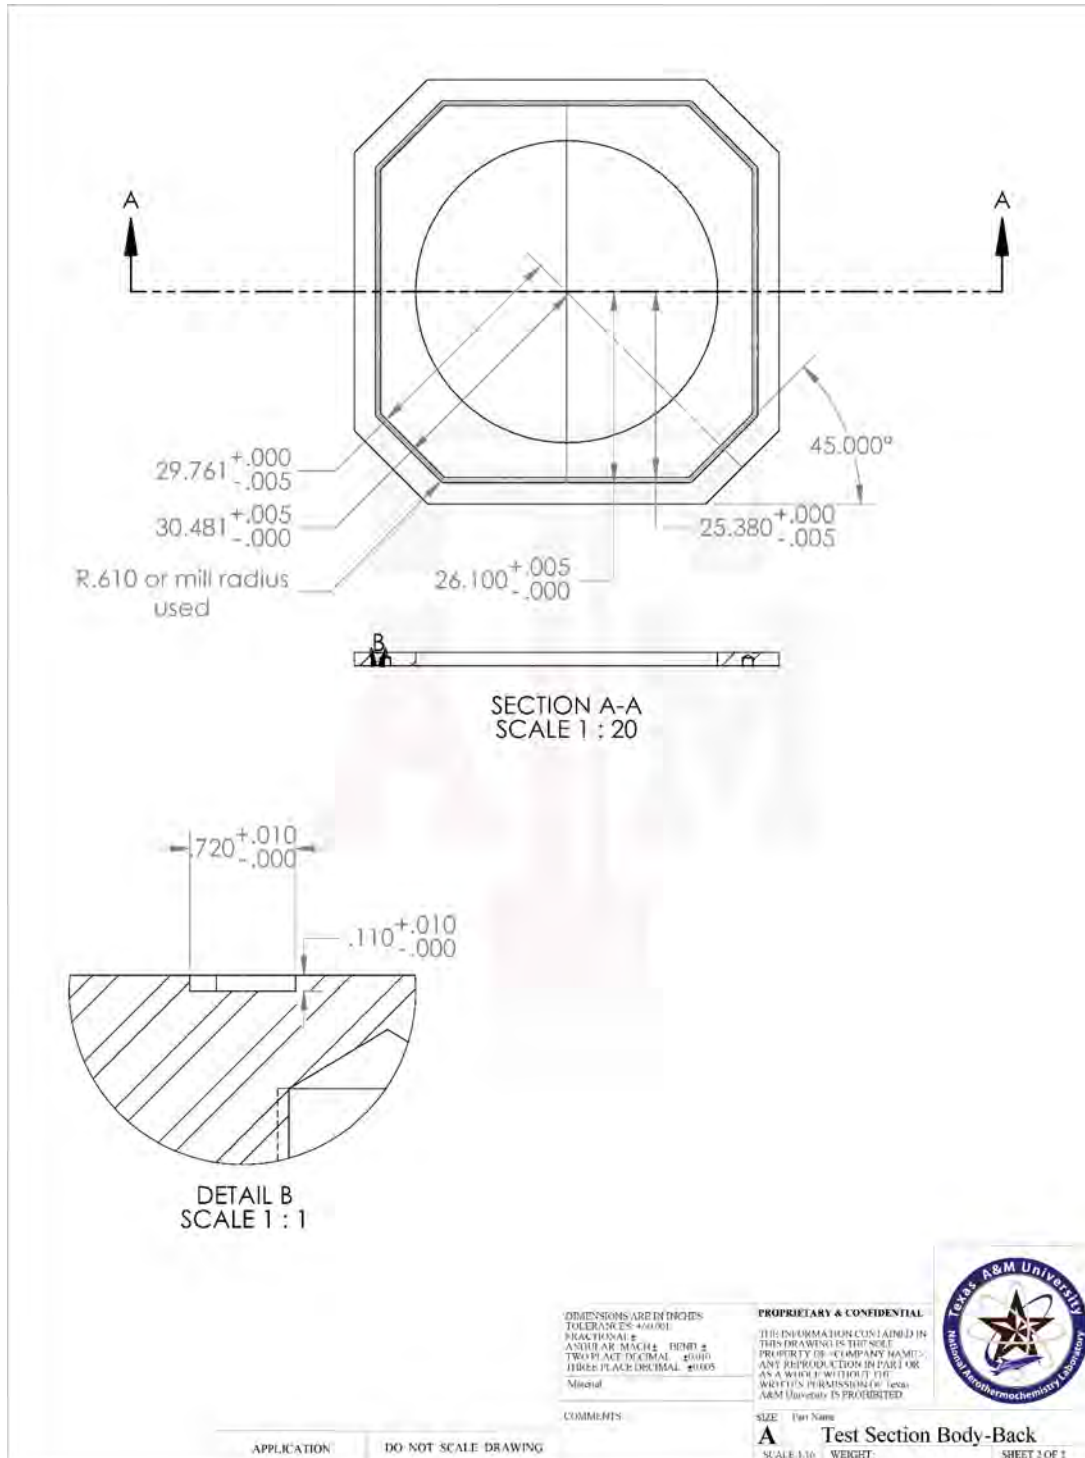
DIMENSIONAL DRAWING FOR THE BACK PLATE OF THE TEST SECTION SKELETON WITH DIMENSIONS FOR THE ALIGNMENT GROOVE.
